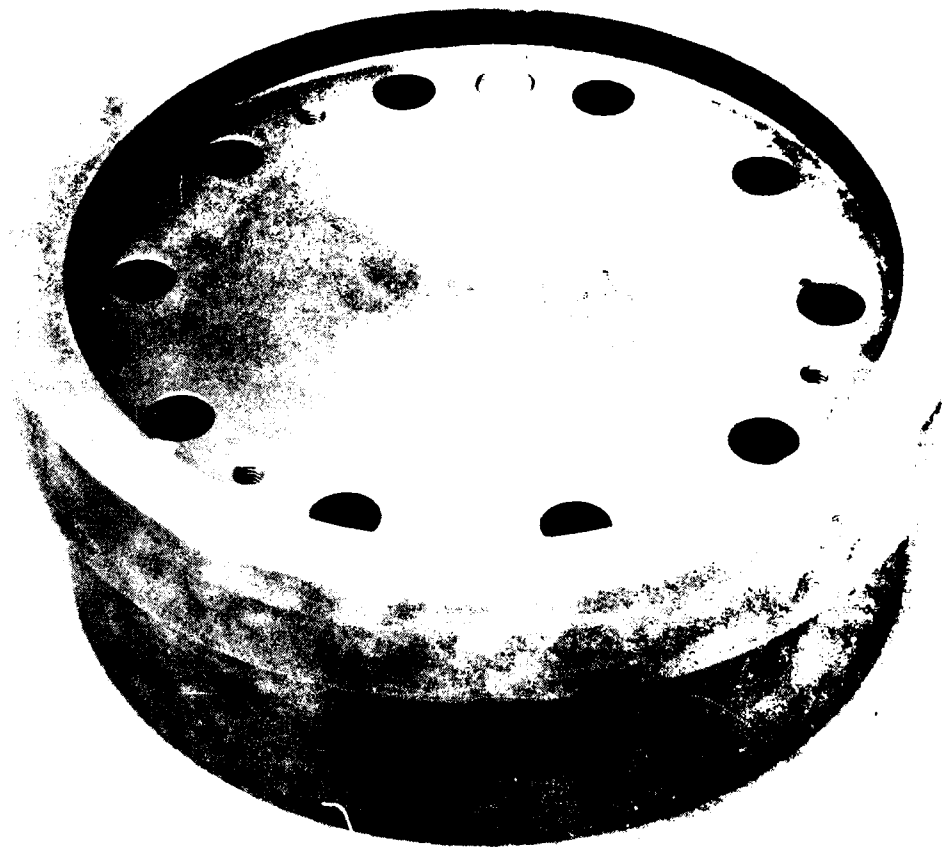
Model 1604-116 (500 in-lb) Torquemeter, View B
